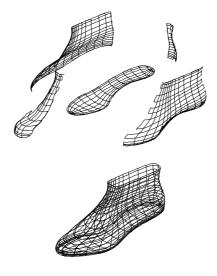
Complex dimensional and geometrical measuring model by using CMM
